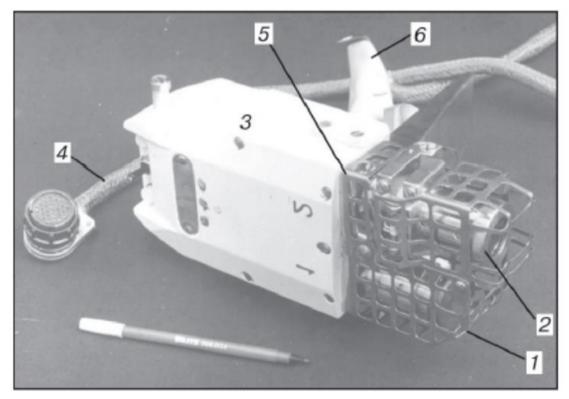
Working tool, 1—electron beam gun for welding, cutting and brazing; 2—electron beam gun (with a crucible) for coating deposition; 3—high-voltage converter; 4—supply cable; 5—screen, protecting hand from heat emission of metal being treated; 6—handle [25]
